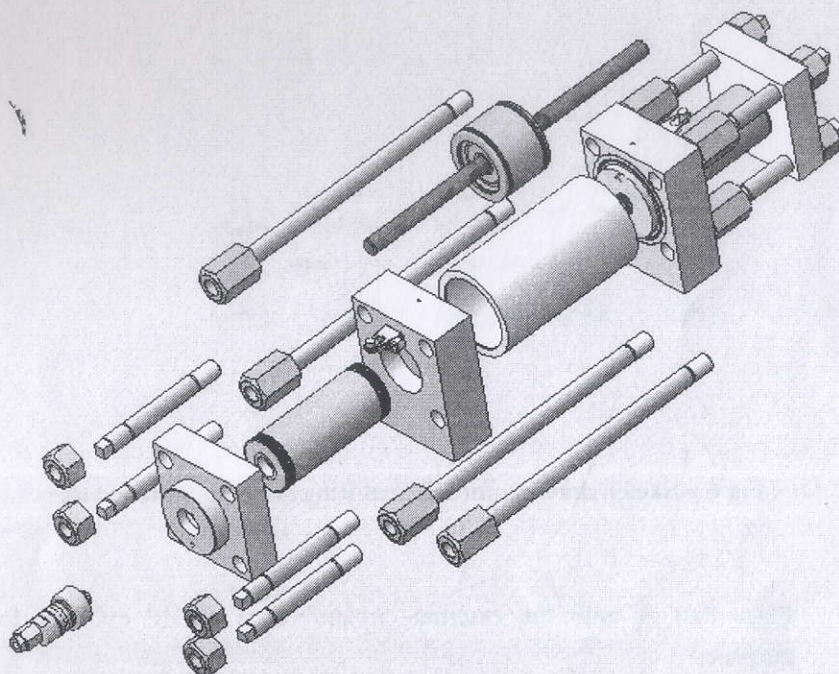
Exploded Diagram of Components of Booster Assembly
